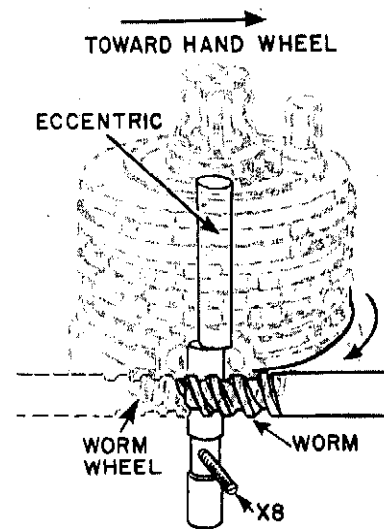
A. Eccentric Worm Wheel Shaft and Worm Wheel
